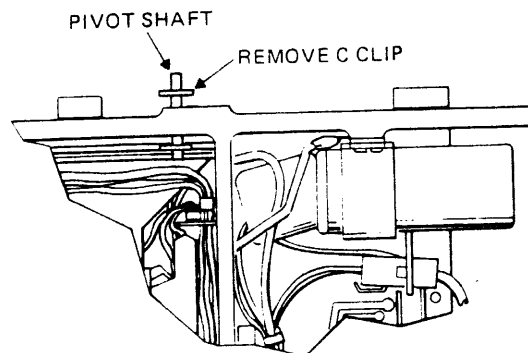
CARTRIDGE GUIDE REMOVAL
